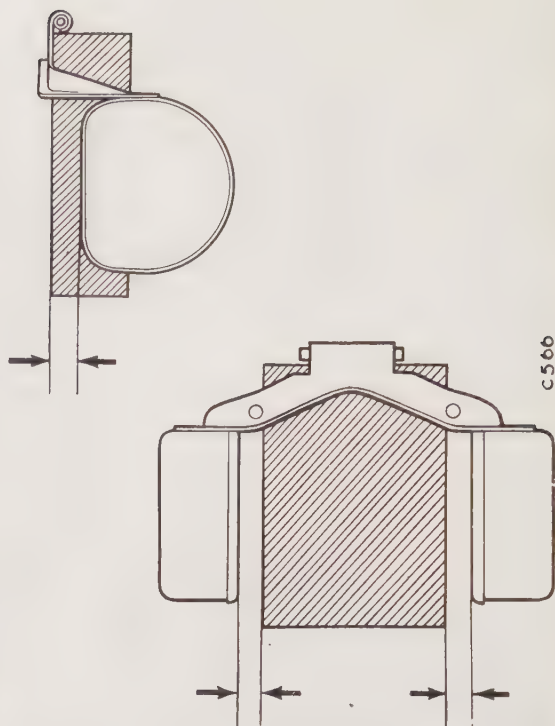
11 Use of wooden block to square-up twin floats, Solex type B32 P1 H carburettor. Arrows indicate parallelism.
